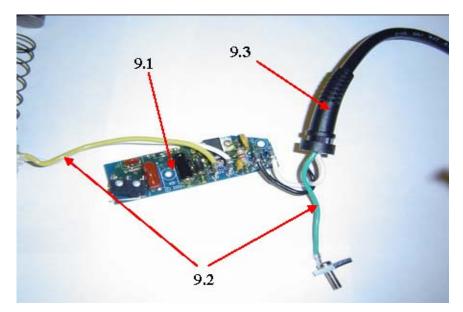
Exploded View of Circuit and Cord Sub Assembly (Module 4) (Source: Prof. Sridhar Kota, University of Michigan, Ann Arbor, MI)
